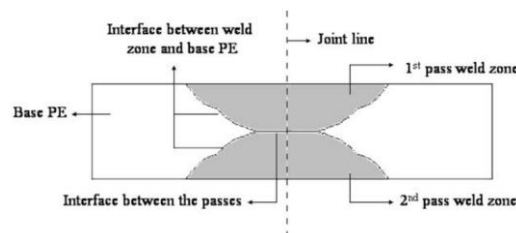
Schematic illustration of the cross section of the joint produced by FSW with double side pass of the tool [27].
